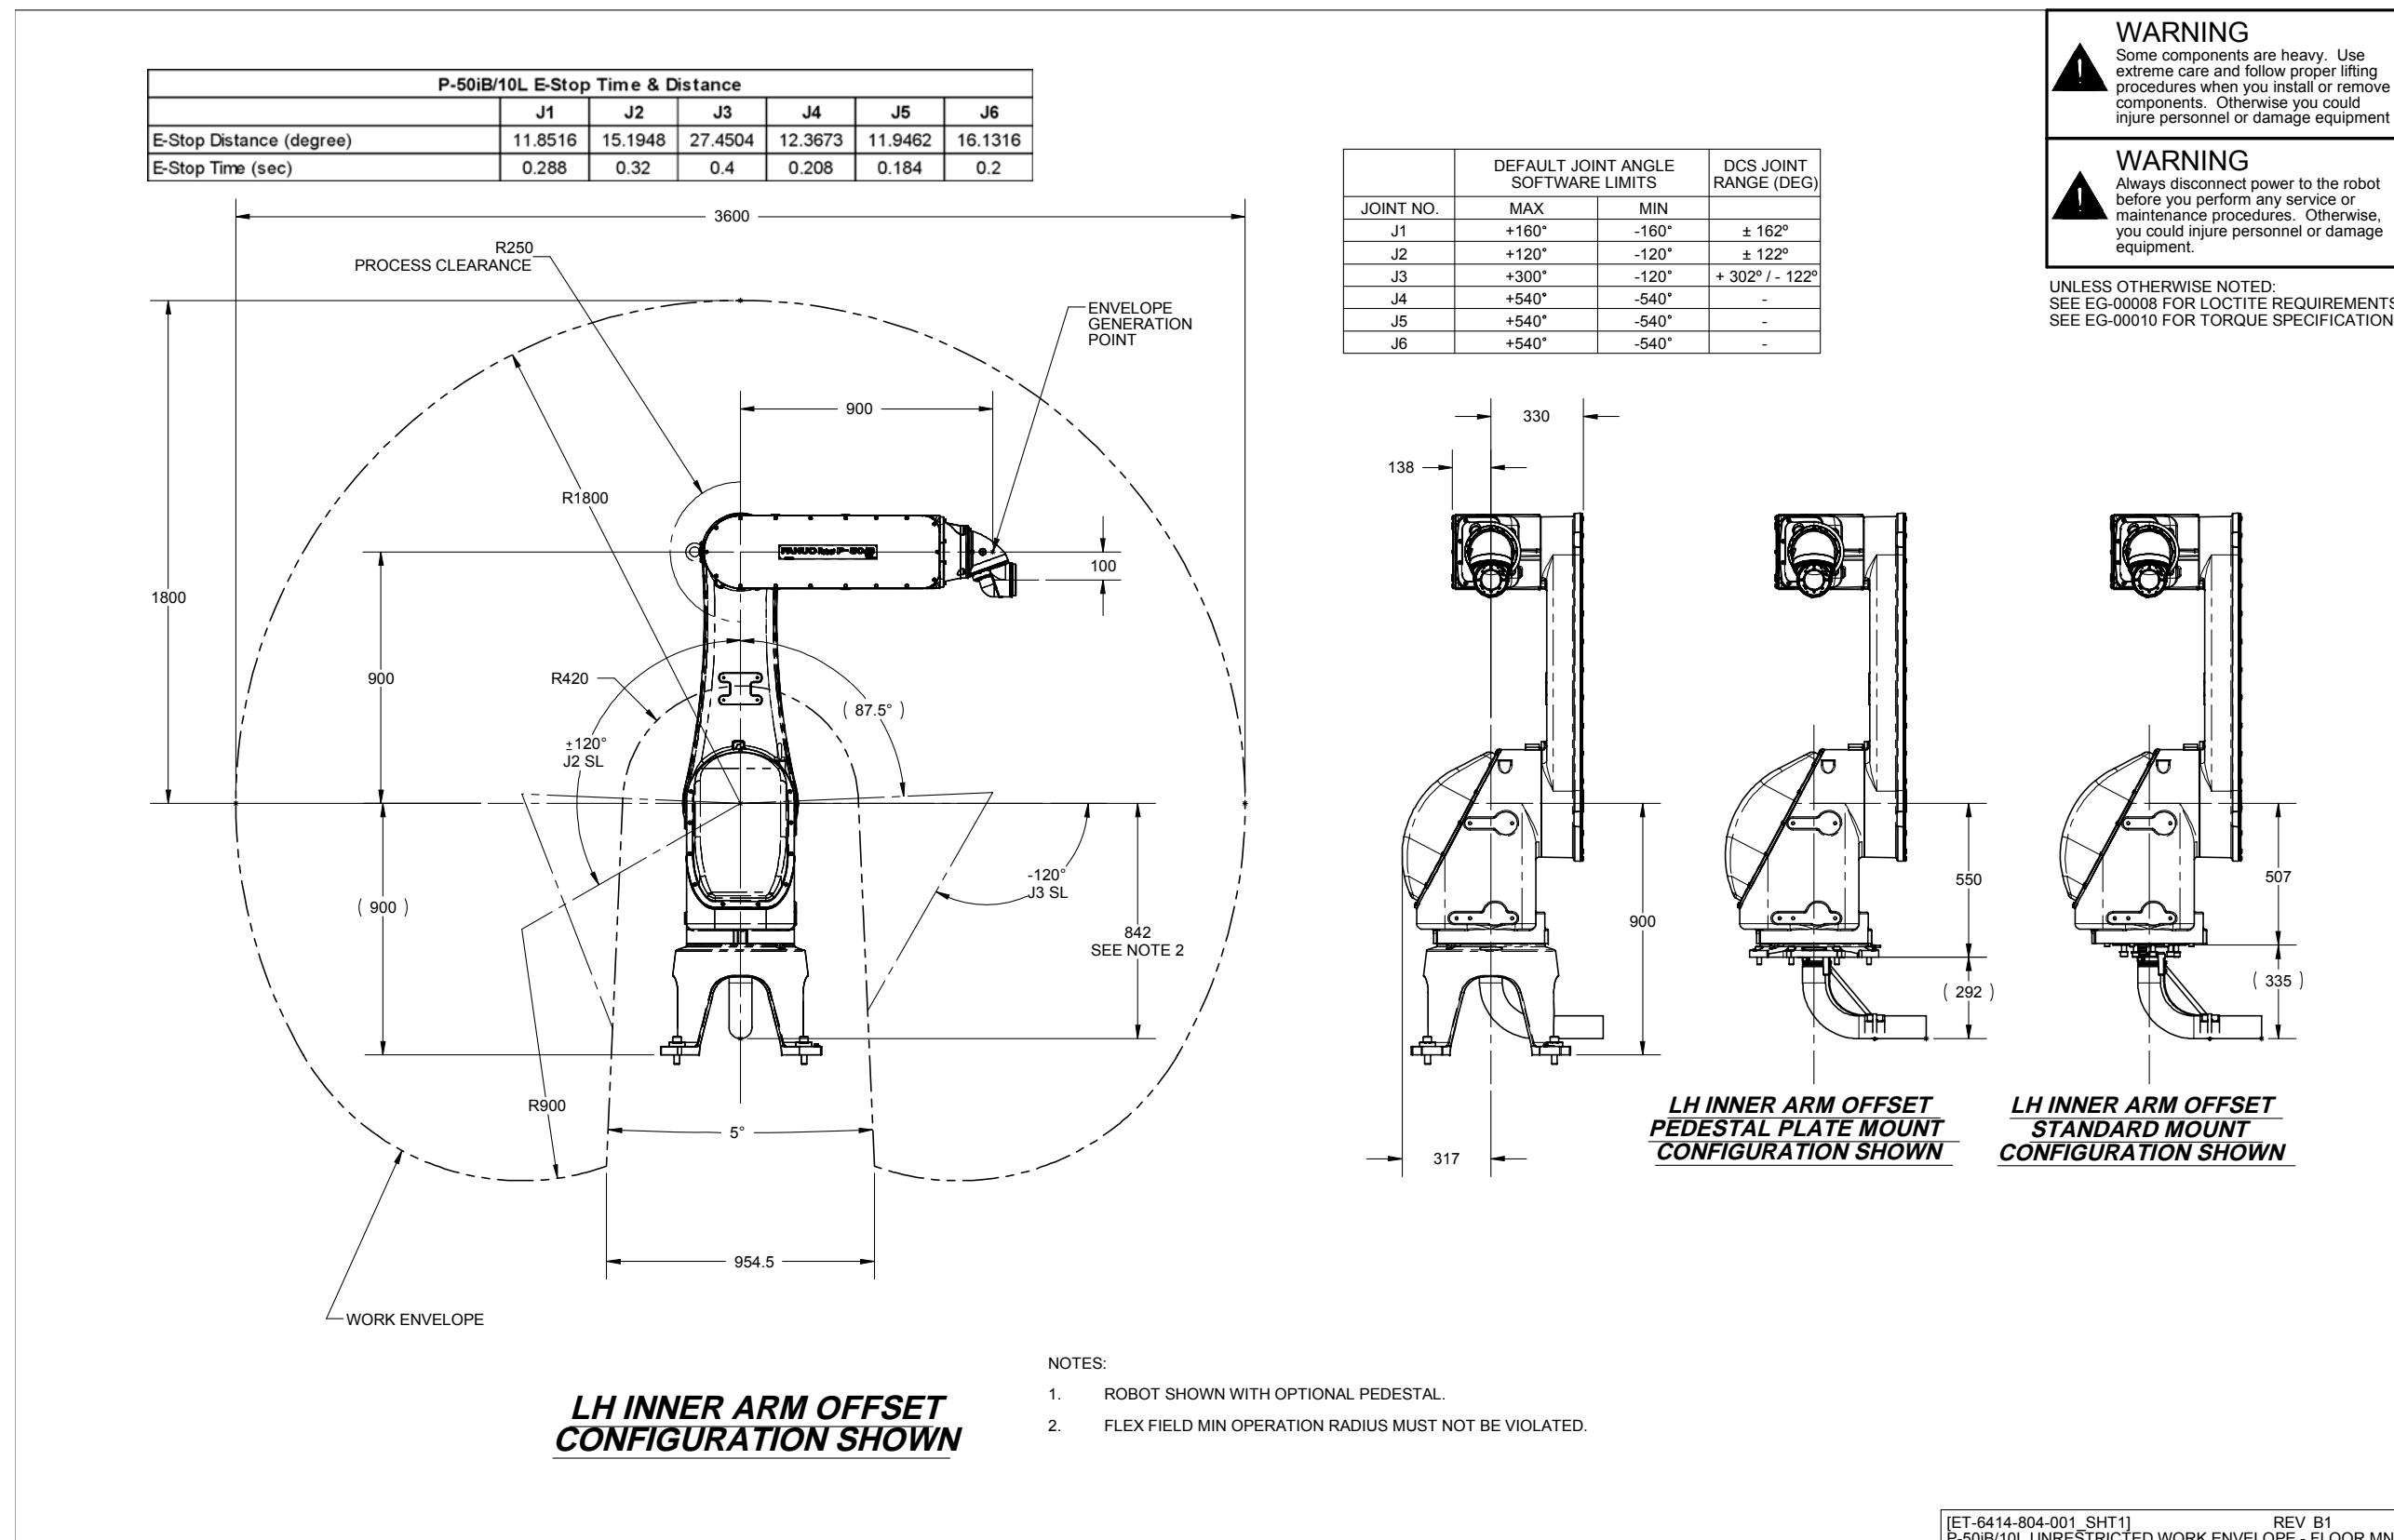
ET-6414-804-001 SHT1, P-50iB/10L UNRESTRICTED WORK ENVELOPE - FLOOR MNT
